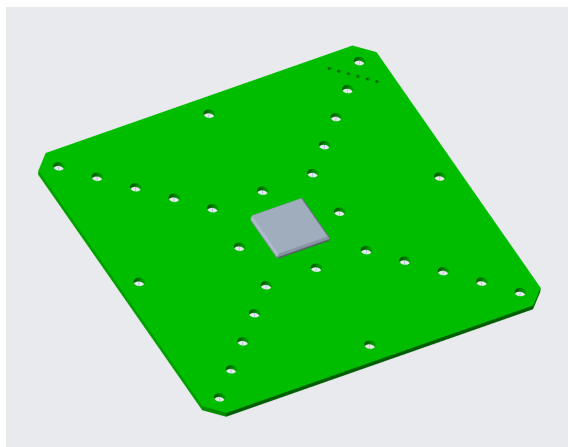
CAD model of PCBA, with the component simplified to a homogeneous solid of correct size assembled to the PCB.
